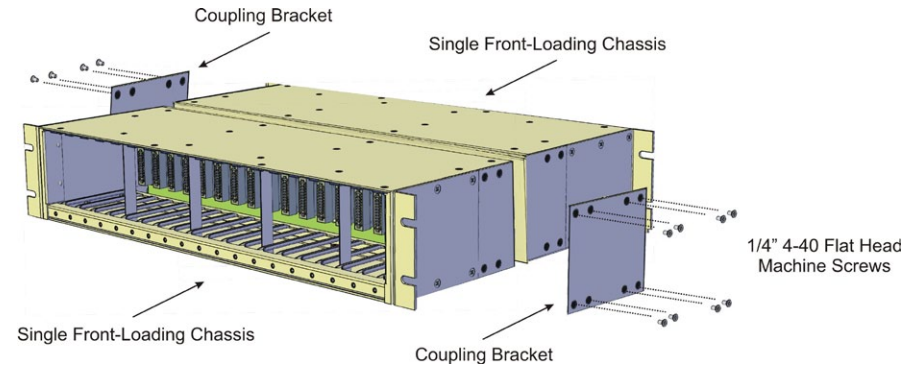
Installation of Coupling Brackets on Two Front-Loading Chassis
